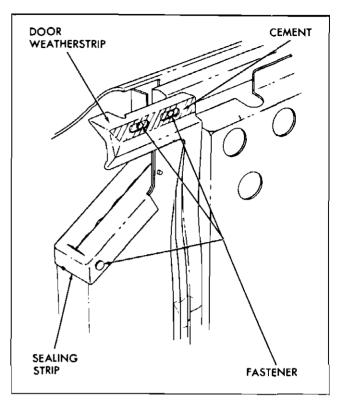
Rear Door Hinge Pillar Sealing Strip
